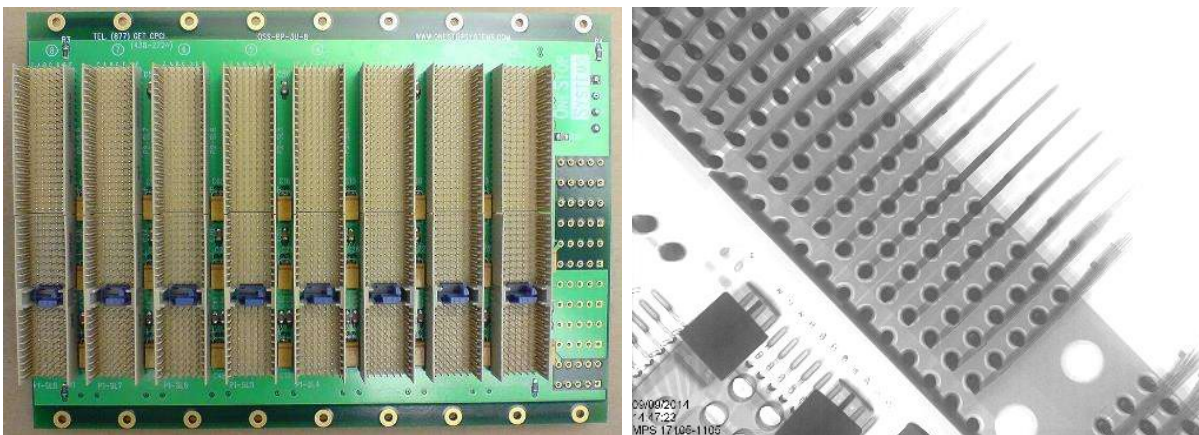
Several 132-pin cPCI connectors mounted in HDI board assembly (left), and X-ray image of complete PTH fill (right)
